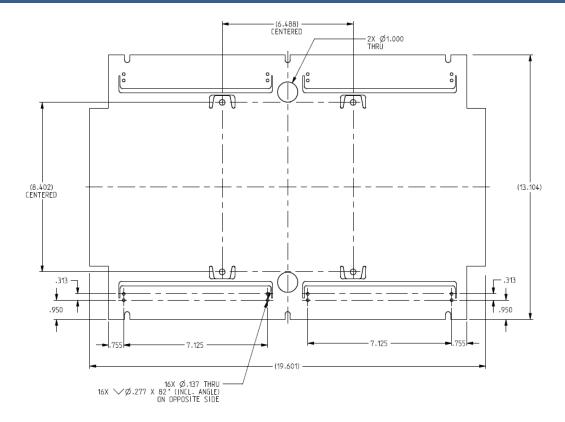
Sheet Metal Layout with Terminal Blocks
